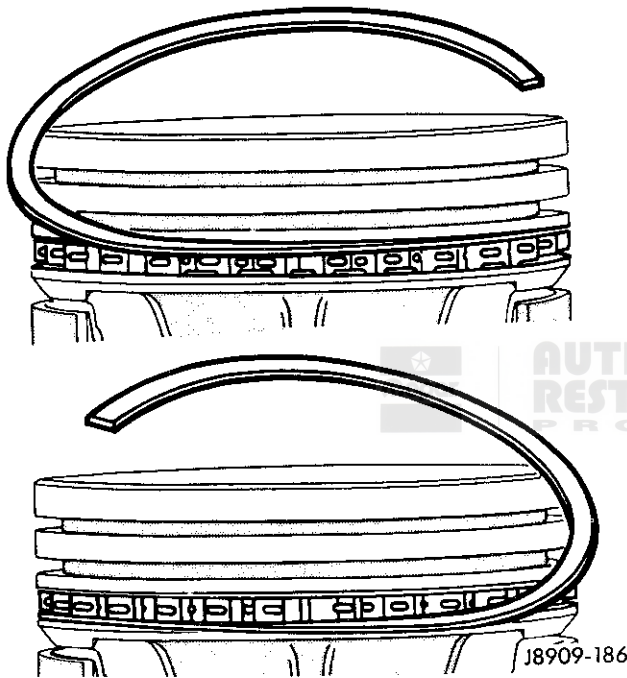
Installing Oil Control Ring Upper and Lower Rails
